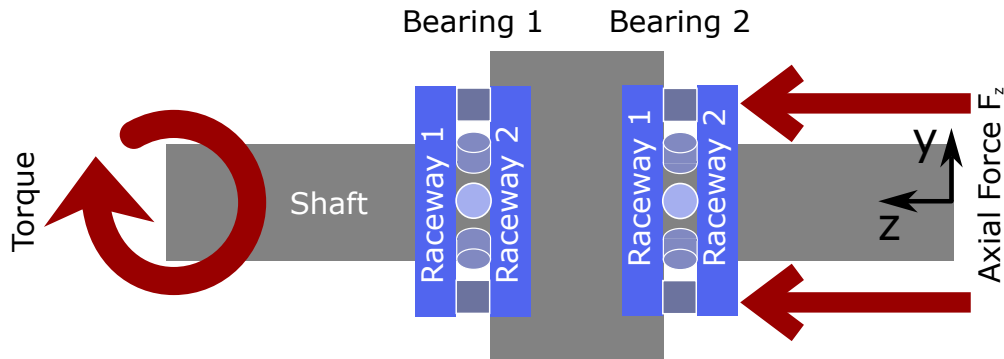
Layout of the FE8 shaft and bearings with their designation and the direction of torque and force
